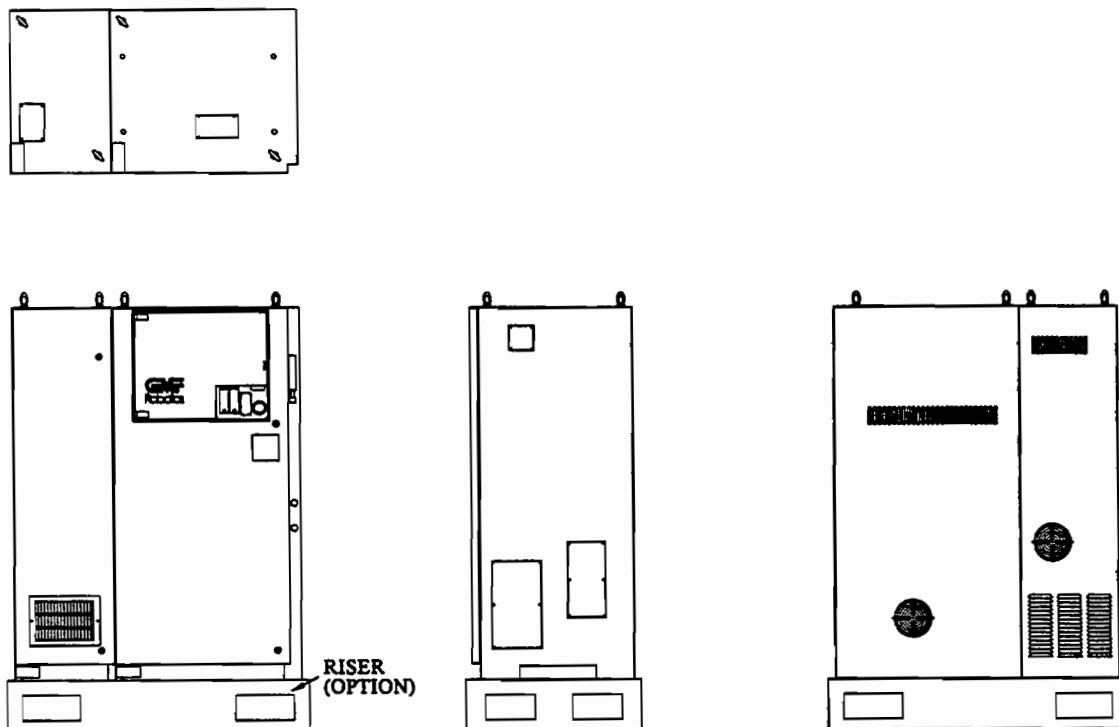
(e) External view of controller (S-700, large size cabinet with side cabinet, power disconnect handle)
